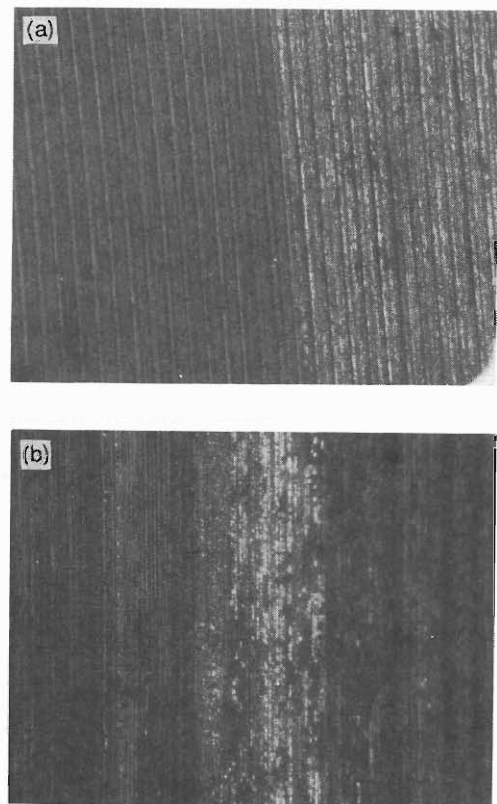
Photographs ($\times 62.5$) of the sealed surfaces of flanges (a) A and (b) B.
